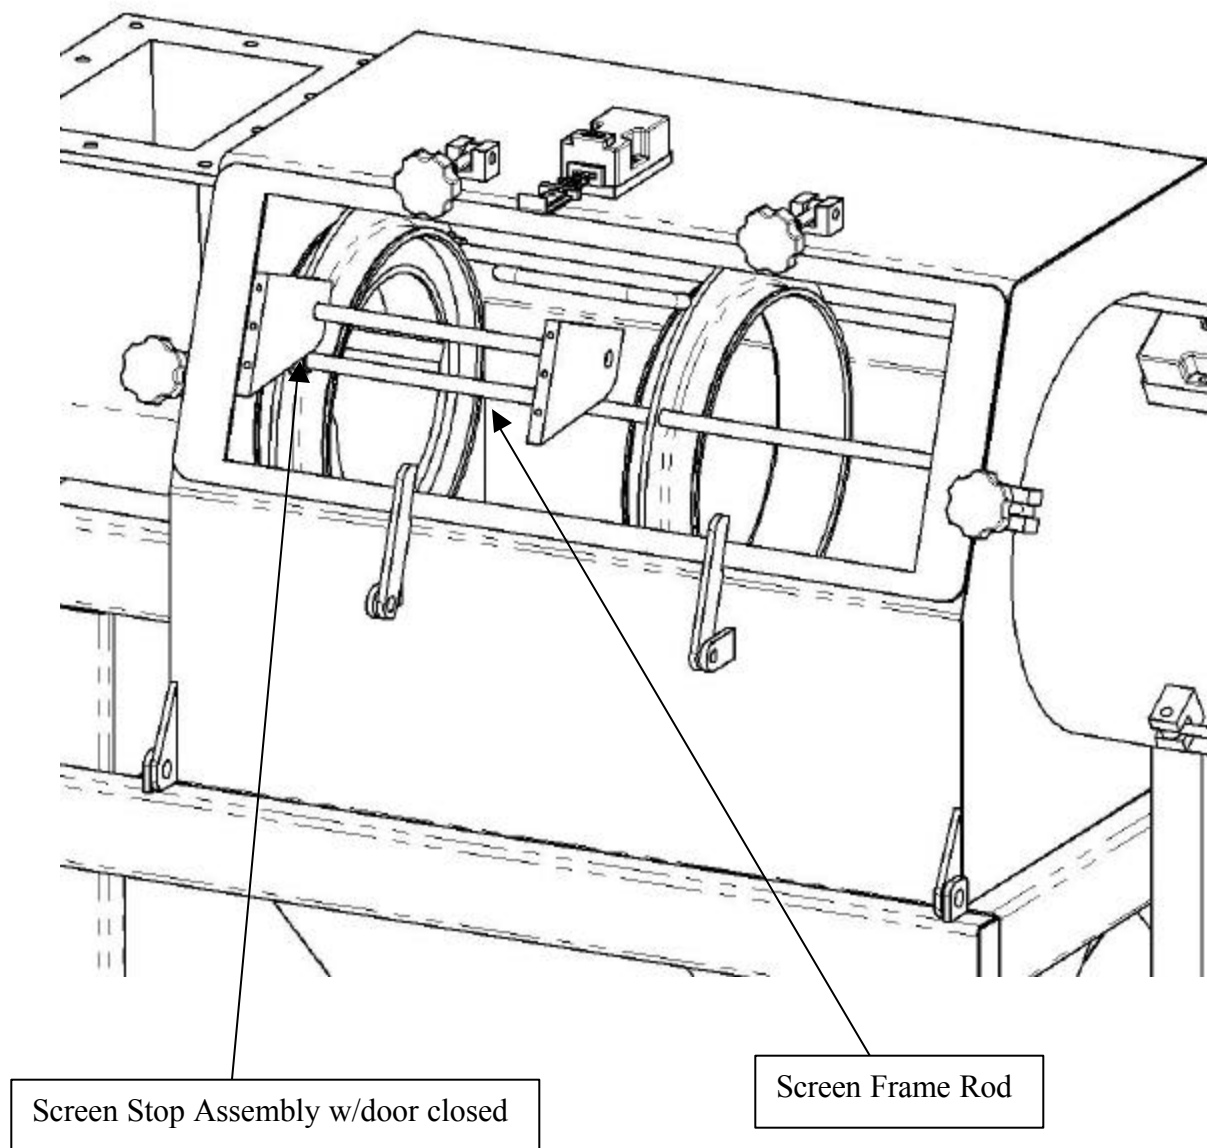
Cut away view of the Screen Stop Position with Inspection Door closed
